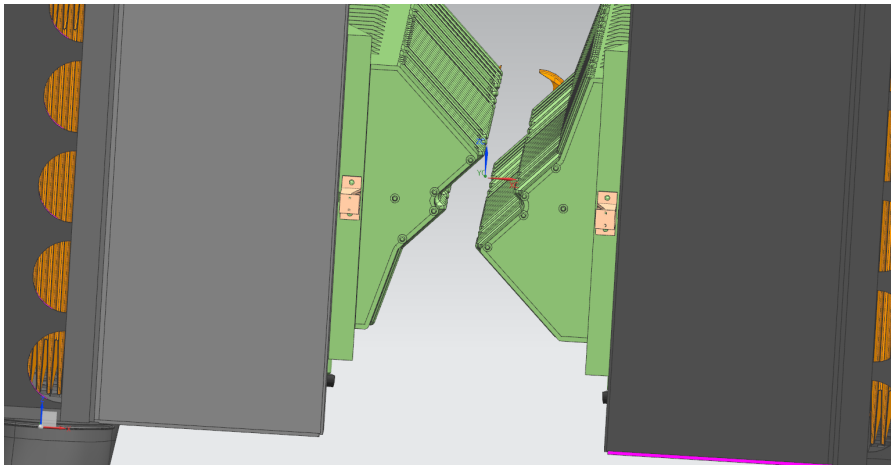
VELO installed and in open position. The supporting cantilevers have already been fixed to the RF-flanges.
